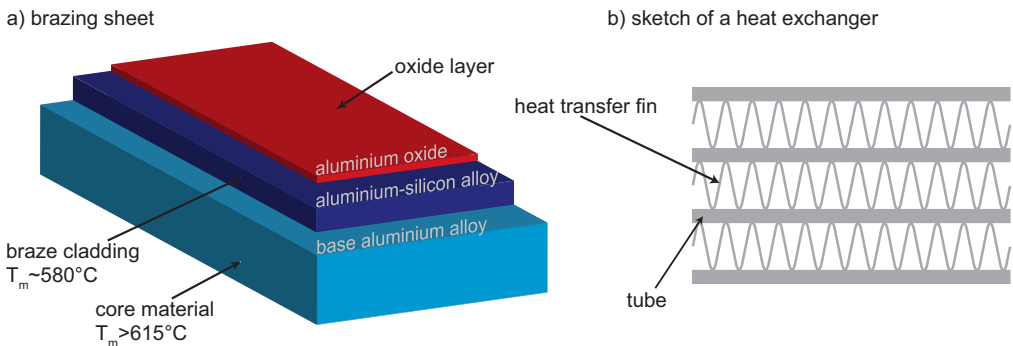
a) Illustration of a typical composition of a brazing sheet and b) sketch of assembly of brazing sheets for a heat exchanger which can be found e.g. in heat exchangers in cars.
